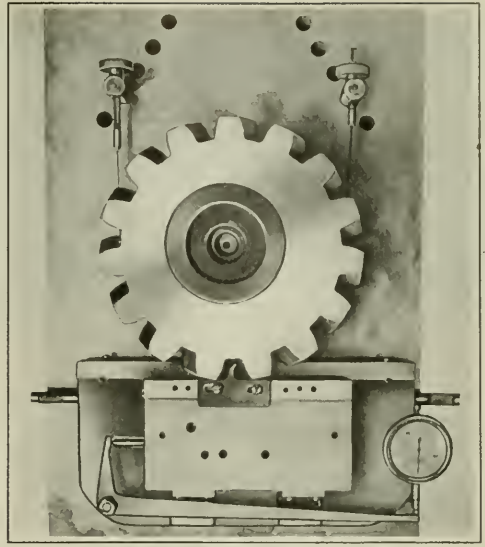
Testing the Involute Tooth Form of a Helical Gear
